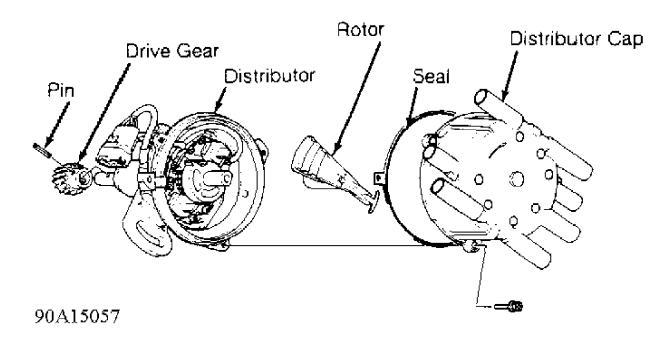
Exploded View of Distributor (929 SOHC) Courtesy of Mazda Motors Corp.
